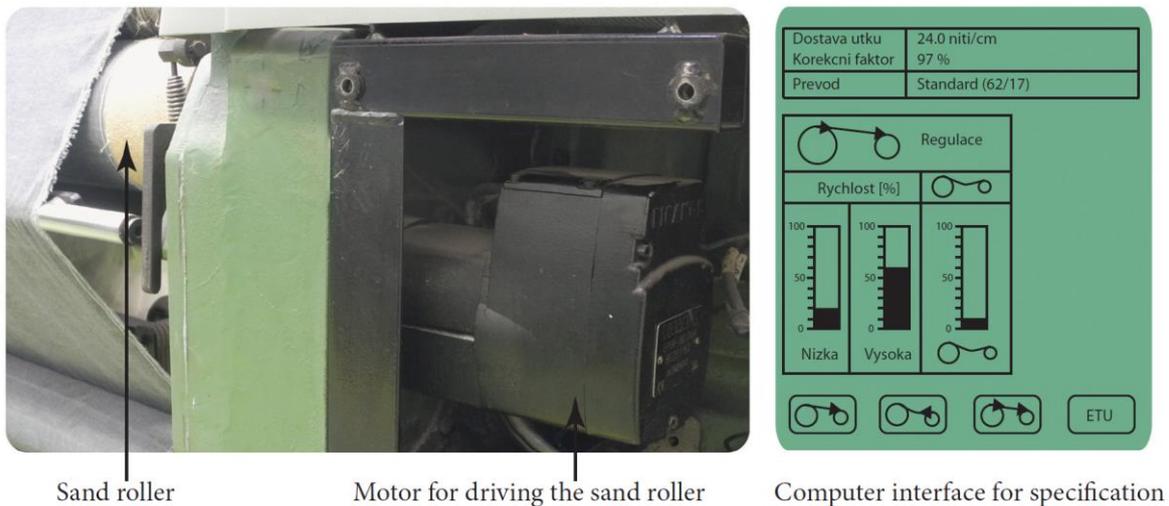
Photograph of the main parts of the fabric take-up system of the Picanol Gamma machine
